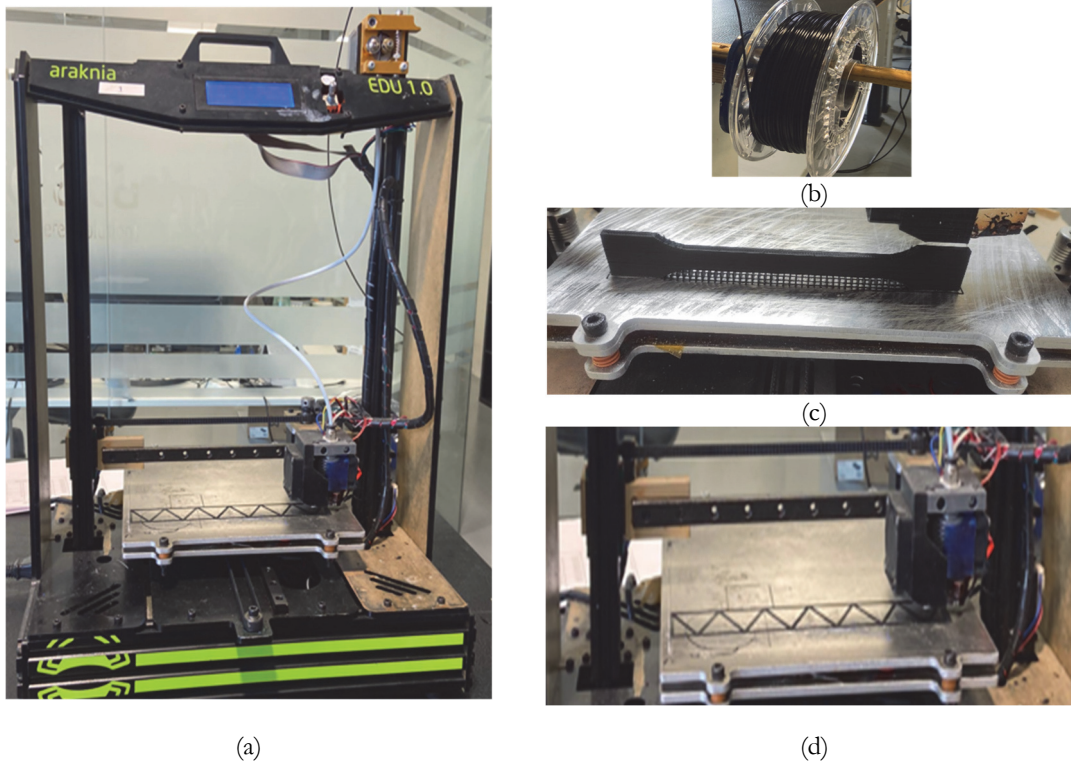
3D-printing process: (a) 3D-printing machine; (b) PLA; (c) DG sample with printed support; (d) beam sample during 3D-printing.
